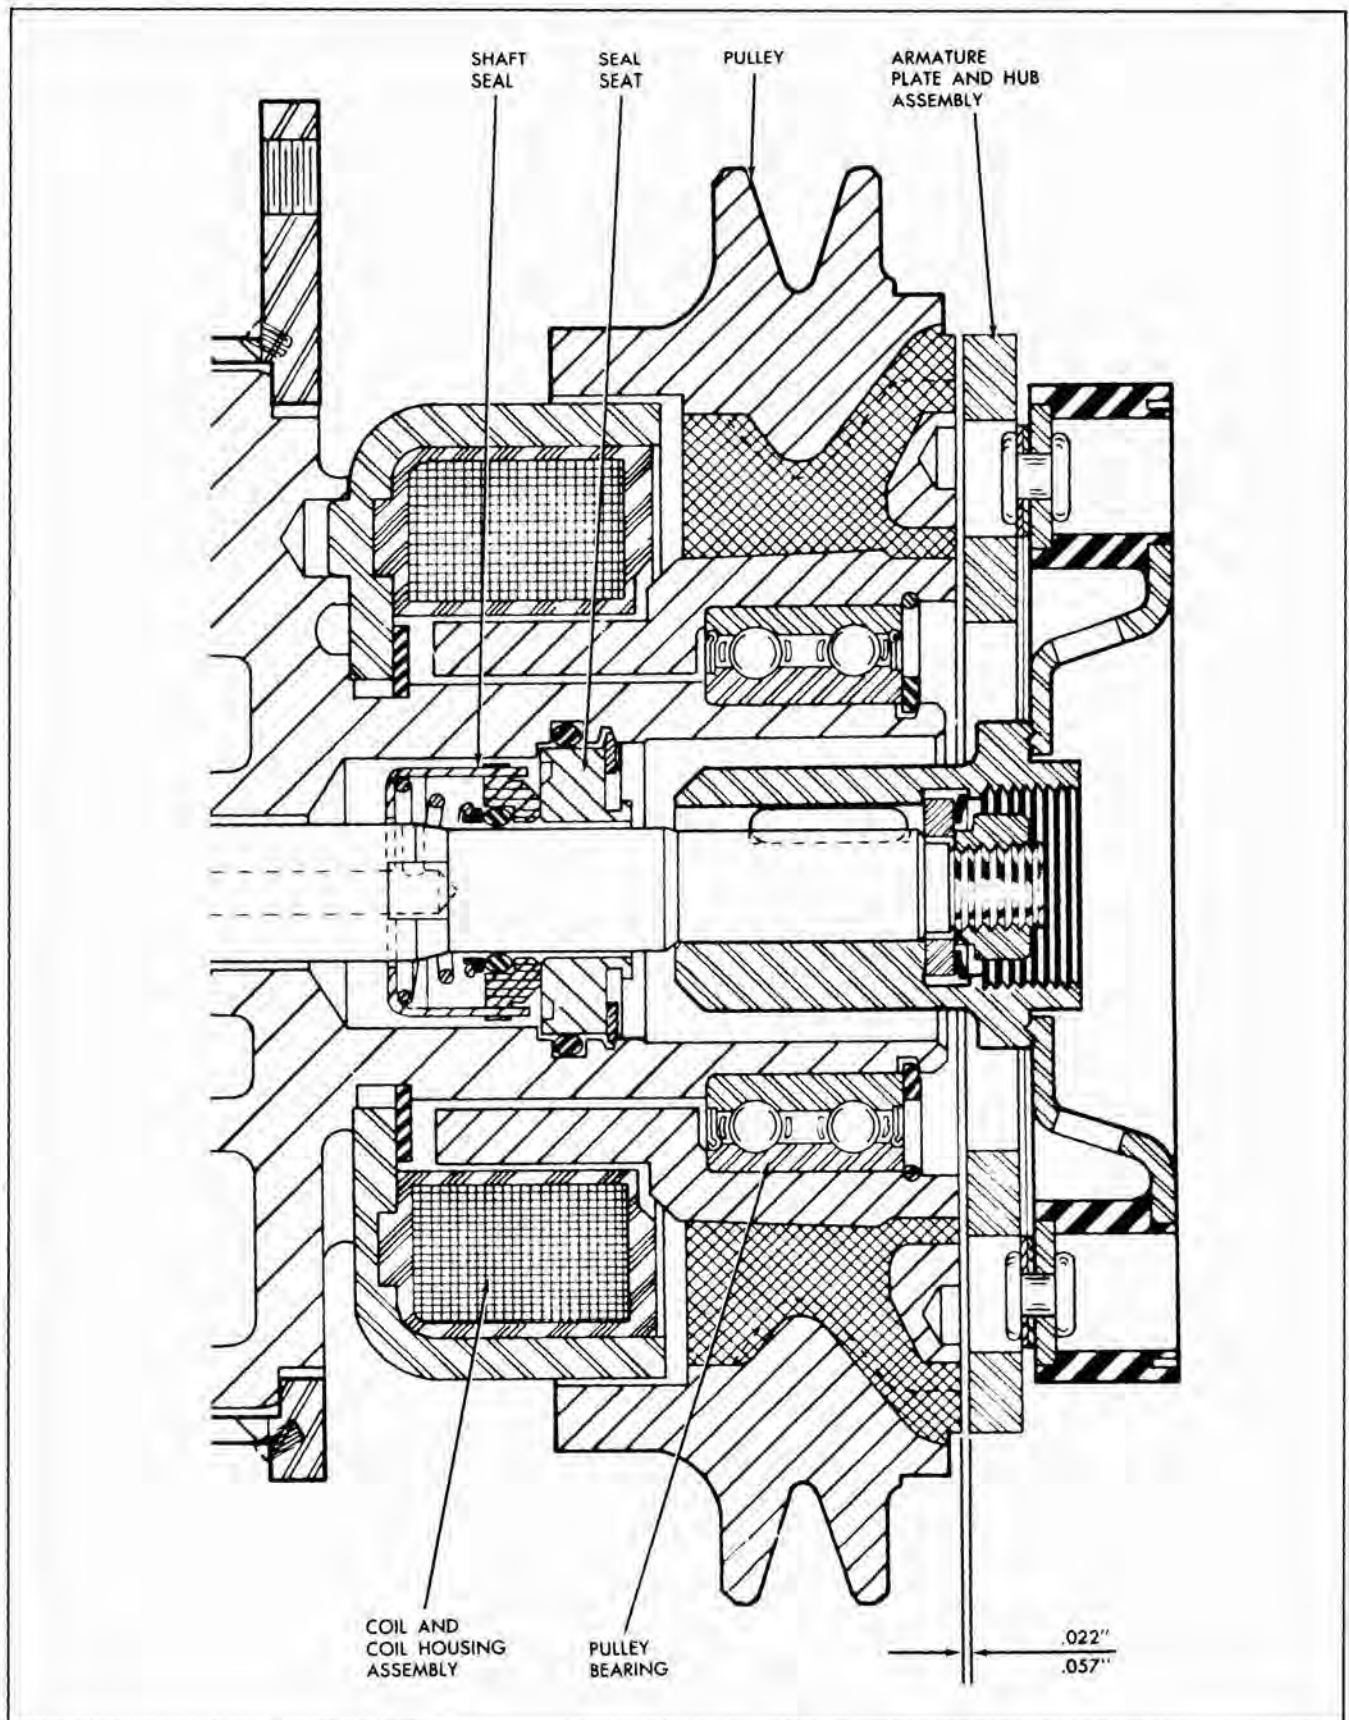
Cross Section of Six Cylinder Clutch Assembly
